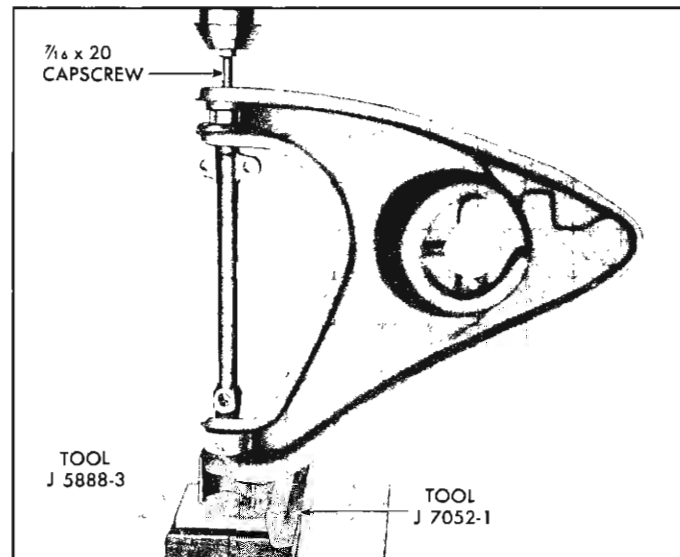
Removing Lower Control Arm Cross Shaft Bushing
